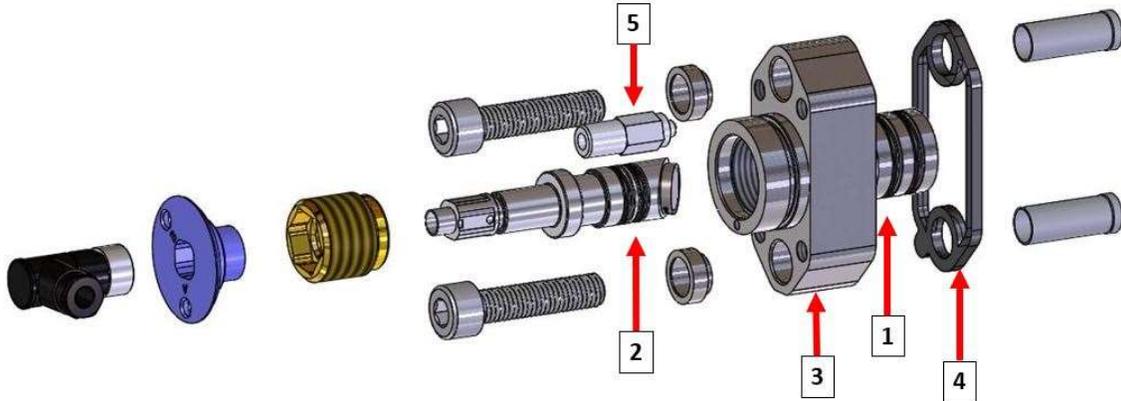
Exploded view of a NG-3 transducer mounting set assembly
